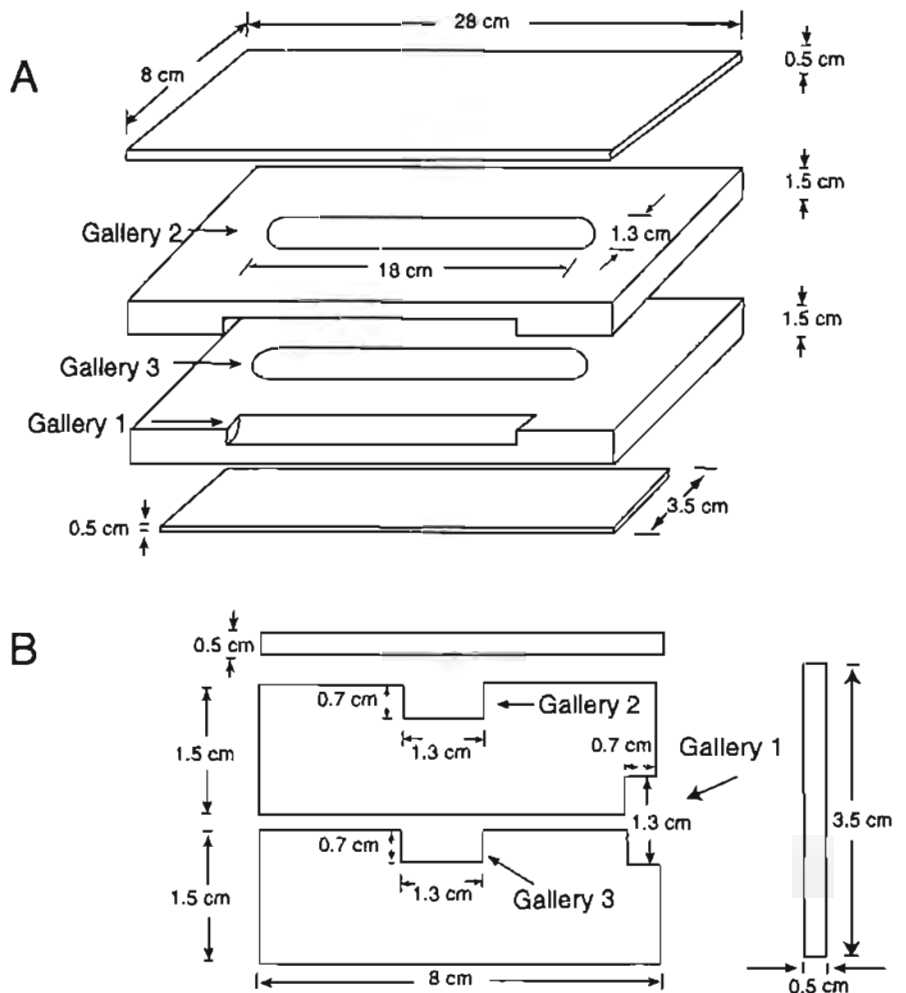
Disassembled (A) and cross-sectional (B) views of a 2 by 4 Douglas-fir board showing routed gallery locations. Drawings not to scale.
